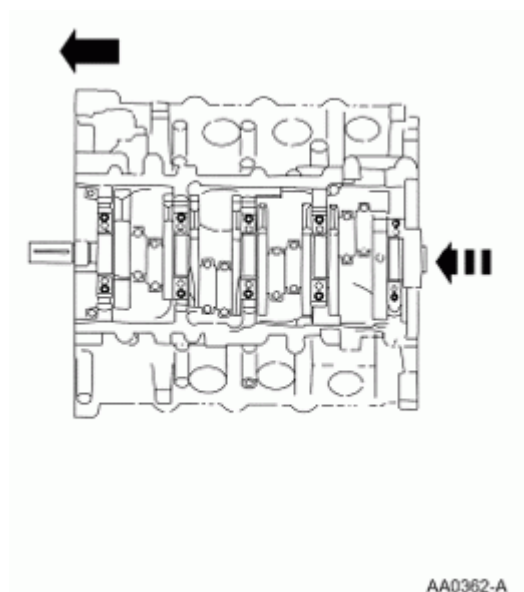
Pushing Crankshaft To Crankshaft Thrust Washer
